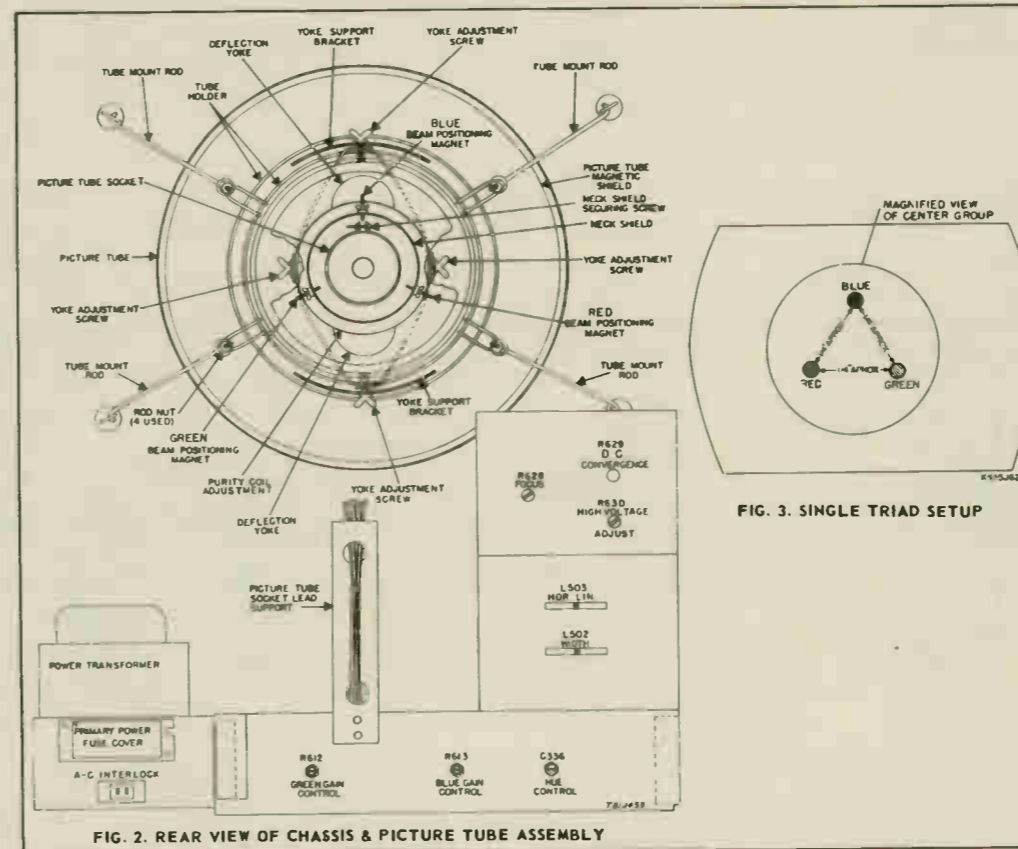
REAR VIEW OF CHASSIS & PICTURE TUBE ASSEMBLY
